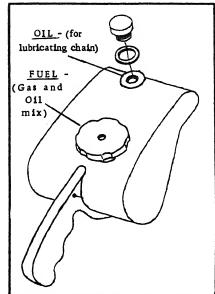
FUEL & OIL TANK ASSEMBLY.
